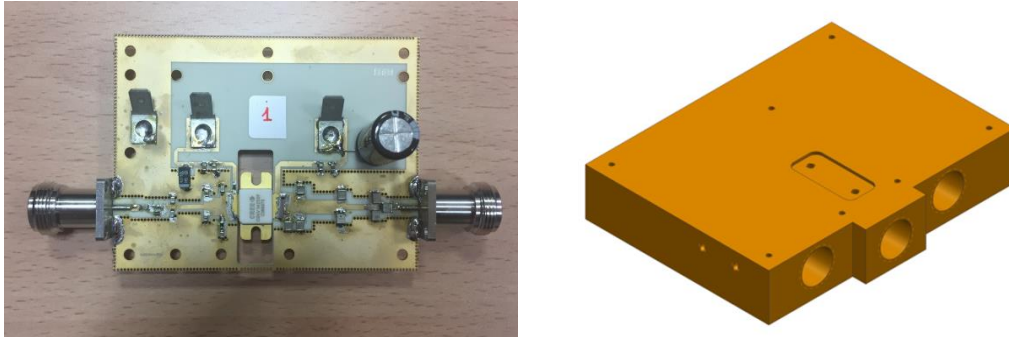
Top view of the prototyped PA v2 (left), 3D view of the designed copper base plate (right).
